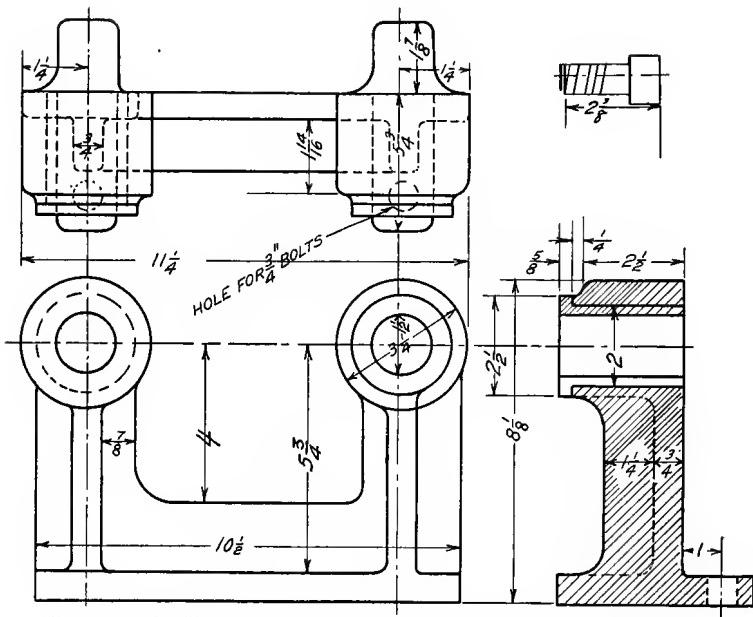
Prob. 48. An incorrect drawing to be checked for errors.
